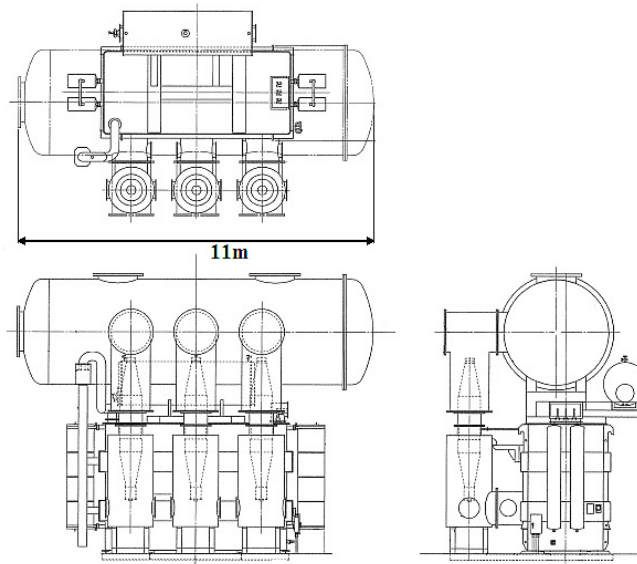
Preliminary CAD drawing of a step-up transformer (courtesy from JAEA)
